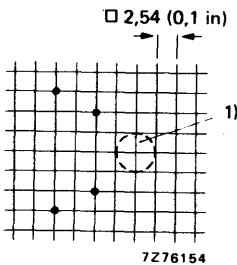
Hole pattern for mounting on a printed-wiring board.
